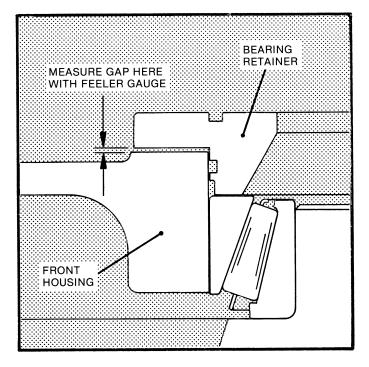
Measuring Gap Between Bearing Retainer and Front Housing.
